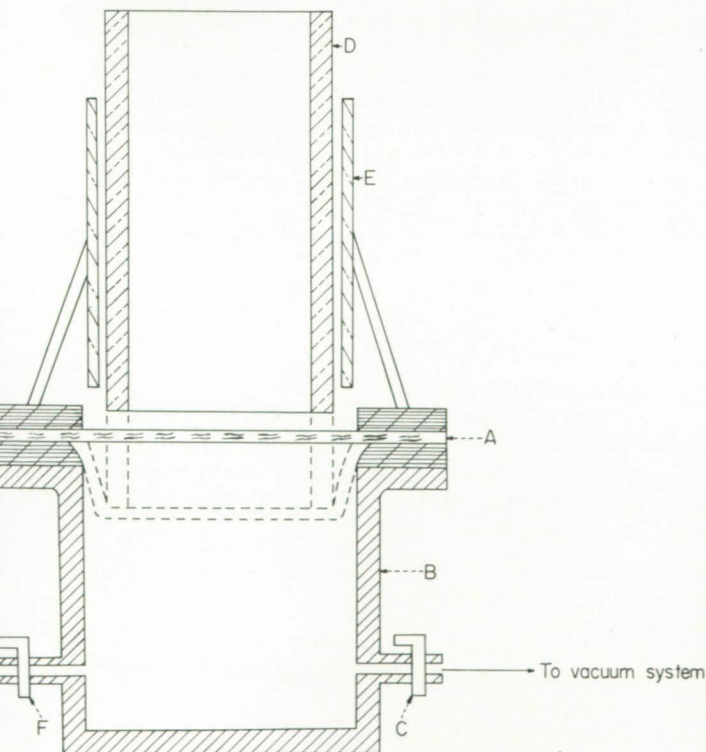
Schematic drawing of vacuum stretching apparatus. A, plastic sheet to be stretched; B, forming vessel; C, valve to vacuum system; D, form; E, guide; and F, valve to atmosphere.
